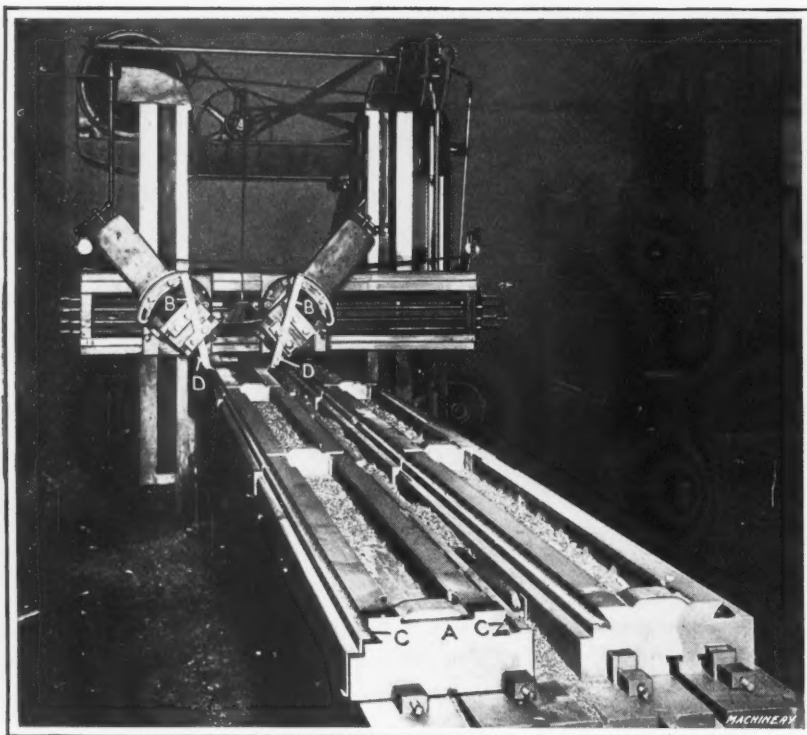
Planing the Under Side of Two Rows of Milling Machine Tables
